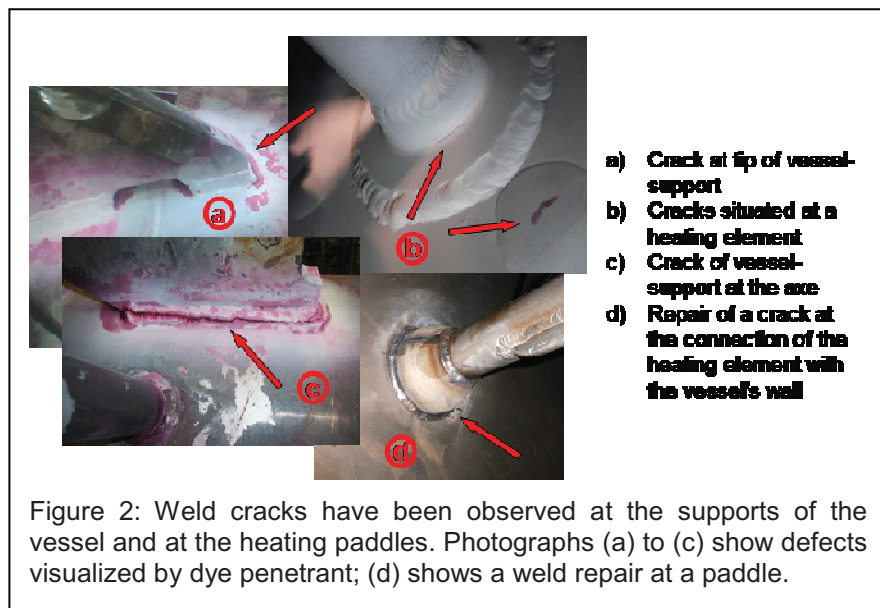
Weld cracks have been observed at the supports of the vessel and at the heating paddles. Photographs (a) to (c) show defects visualized by dye penetrant; (d) shows a weld repair at a paddle.
